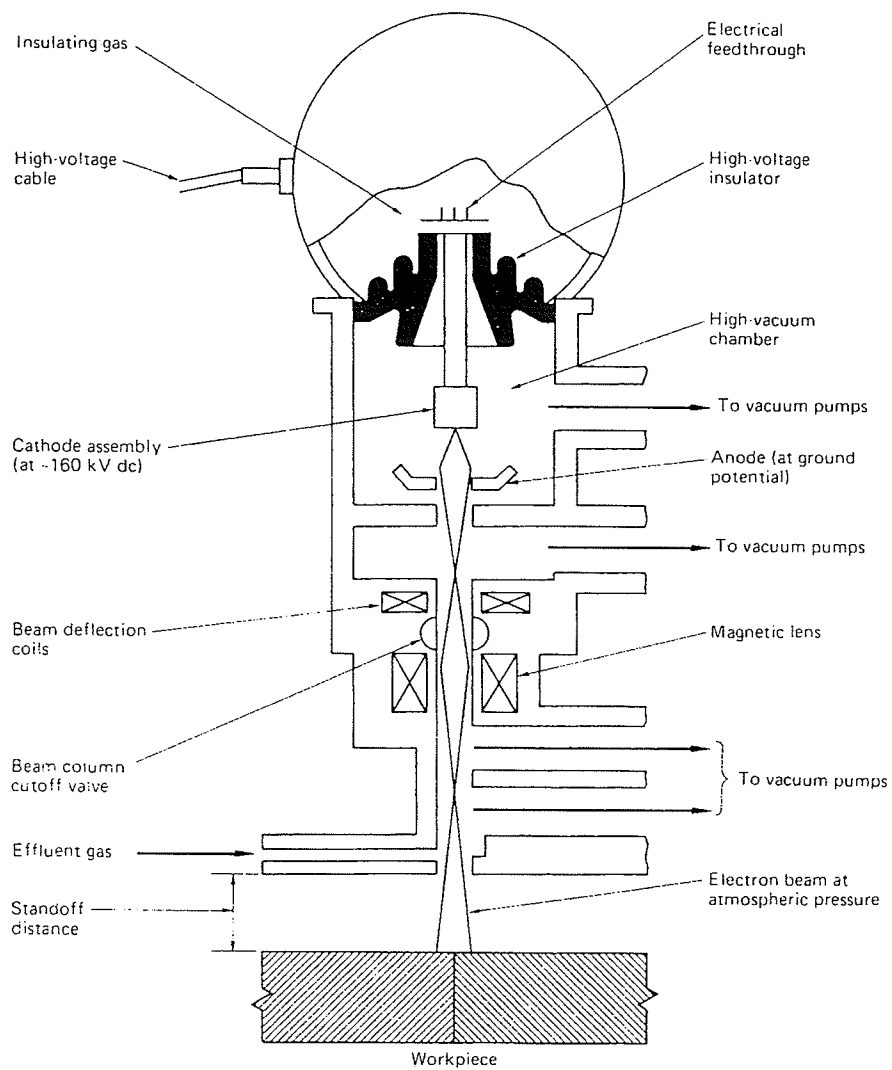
Schematic showing the primary components of an electron beam welding head
